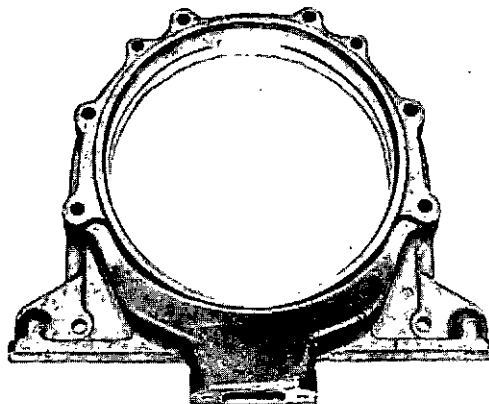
, V40150. Rear cover (piston ring type)
